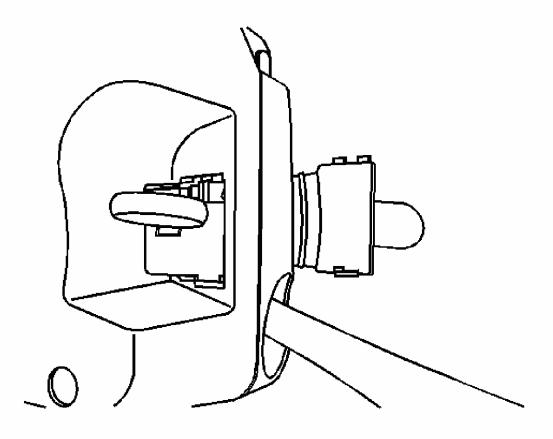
View Of Tilt Lever Close Out Plate Courtesy of GENERAL MOTORS CORP.
